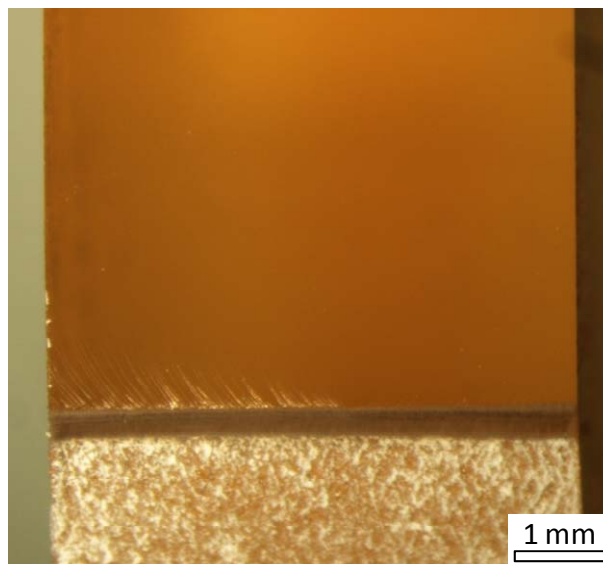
Characteristic fracture surface of a specimen with a sharp crack (specimen sharpened using a femtolaser)
